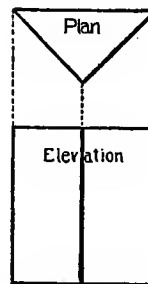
Mechanical Drawing of Fig. 50 in Position of Fig. 53
